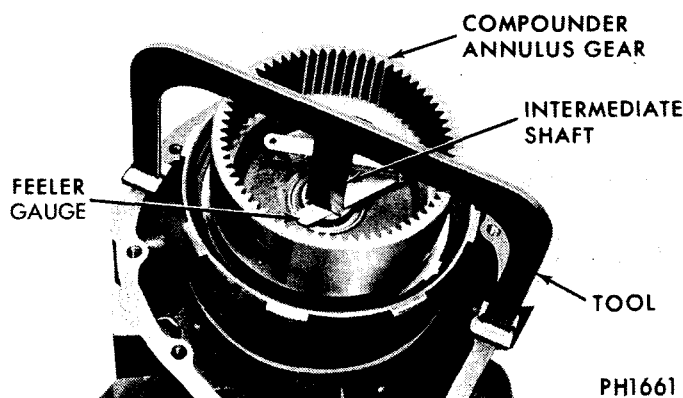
Selecting Proper Thrust Washer Thickness Using Tool C-4222 and Feeler Gauge
